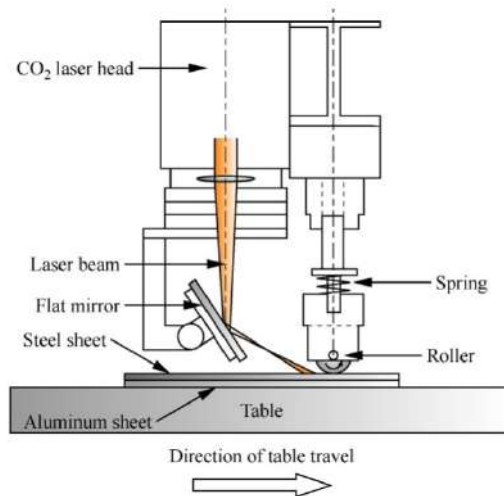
Schematic diagram of Laser Roll Welding process
